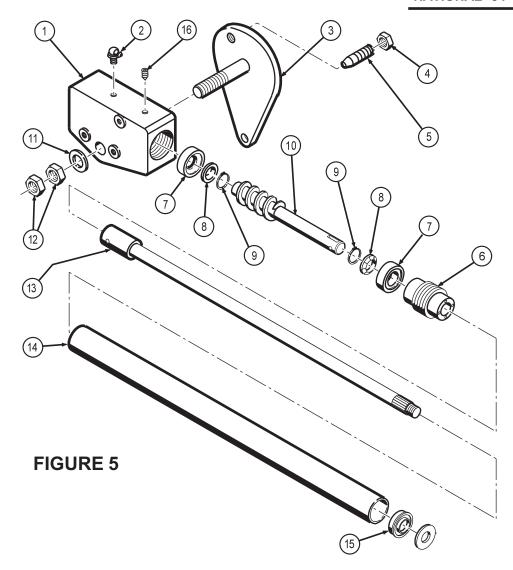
STEERING GEAR ASSEMBLY, 201141
